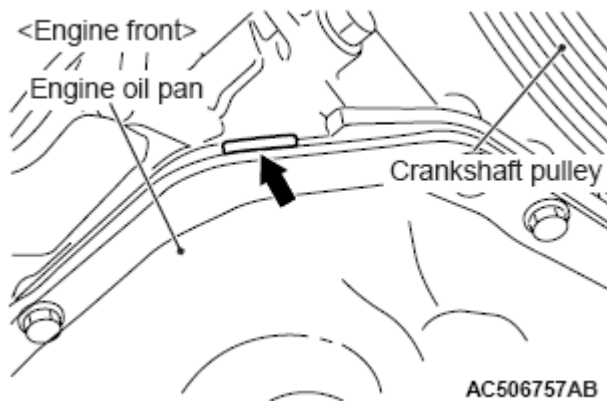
Removing Engine Oil Pan (1 Of 3)
